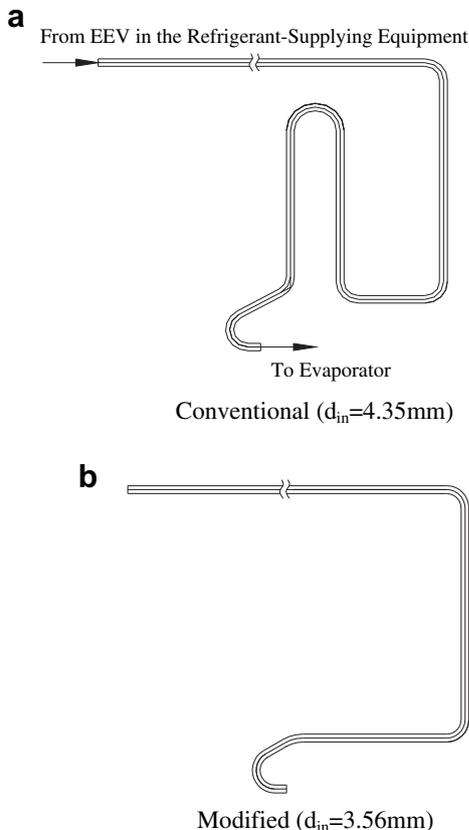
Modified design of the evaporator-inlet pipe for the test unit.
